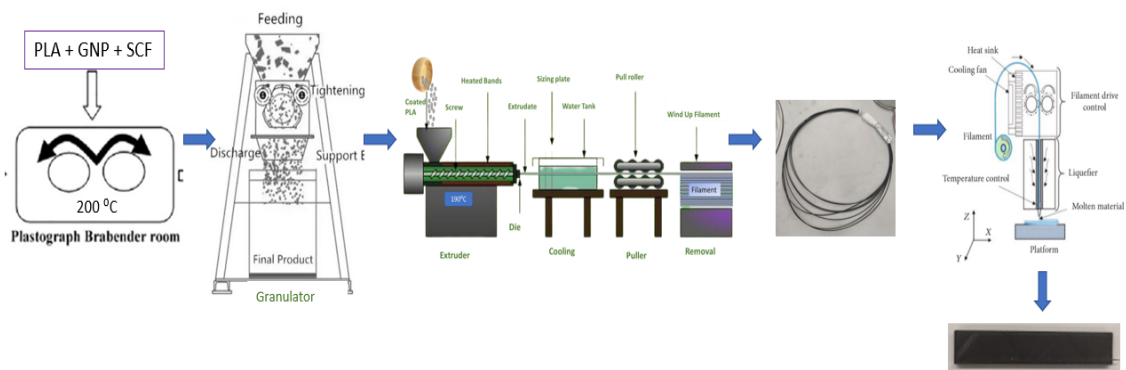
Complete diagram of 3D printed samples' manufacturing process using plastography.
